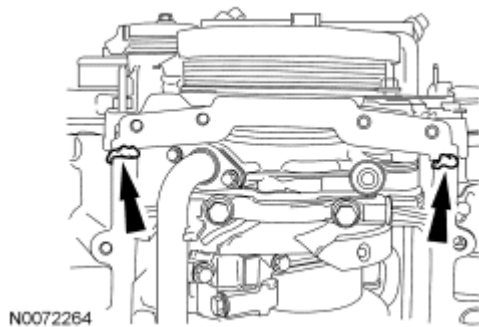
Applying Silicone Gasket & Sealant At Engine Front Cover-To-Cylinder Block Sealing Surface
